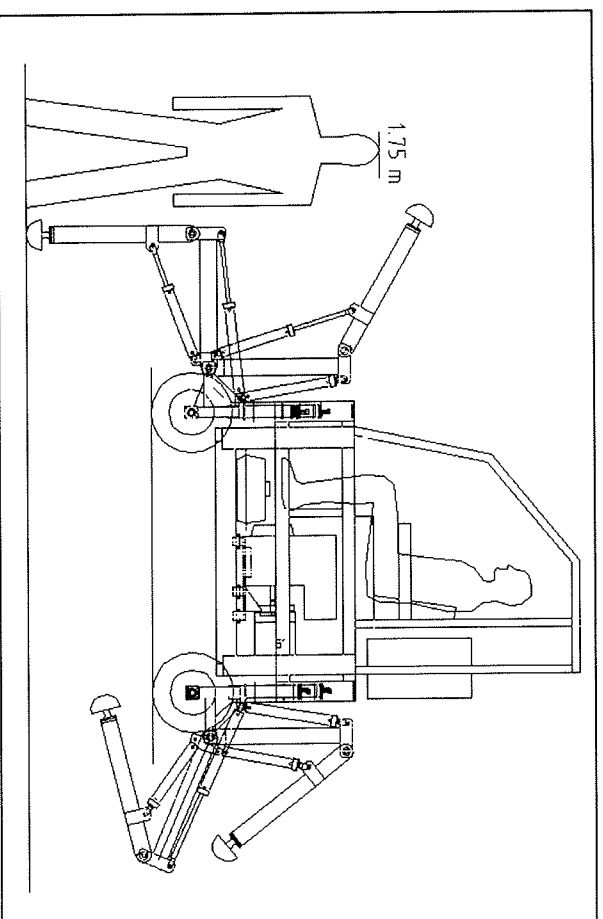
Side layout view of the Hydrobug showing extreme foot positions
